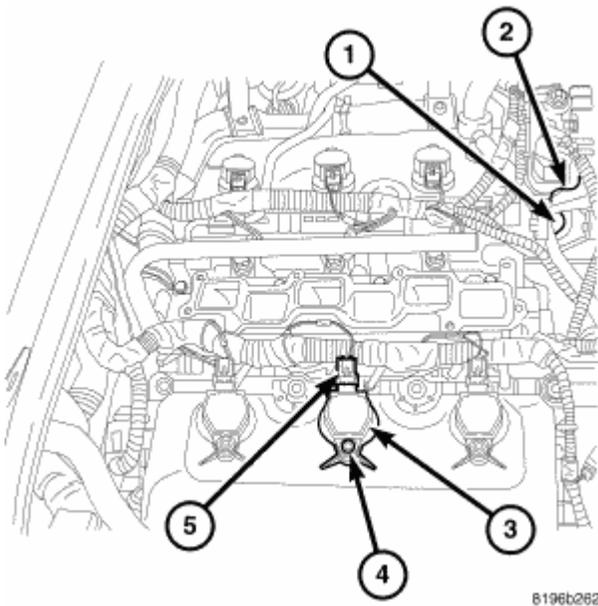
Identifying Right Cylinder Head, Sensor Mounting Bolt & Camshaft Position Sensor (CMP)
